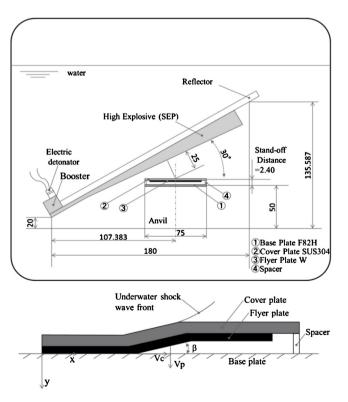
Schematic drawing of underwater explosive welding.
